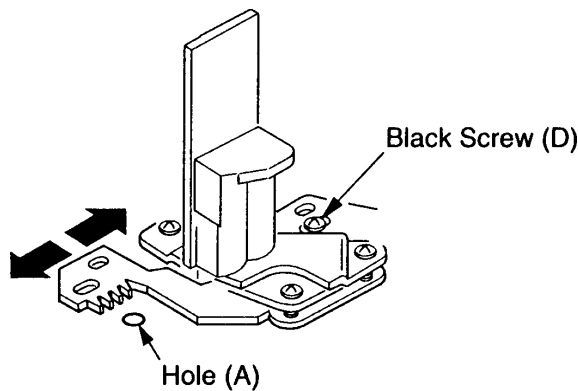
A/C Head Horizontal Position Adjustment/Confirmation
